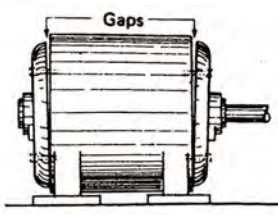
A motor showing end plates not mounted properly. This prevents the rotor from turning. Use a mallet to tap plates into position.
